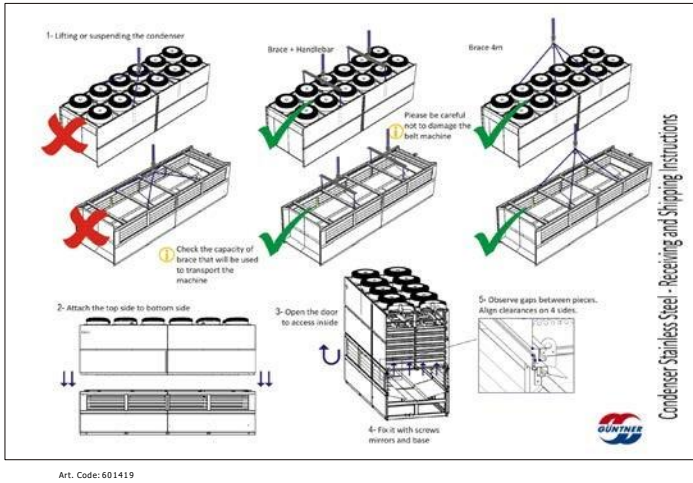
Instructions for receiving, handling and assembly of upper and lower modules.
